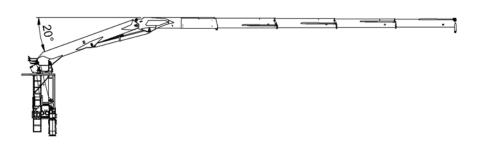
BASIC POSITION DURING VALVE TESTING & ADJUSTMENT
